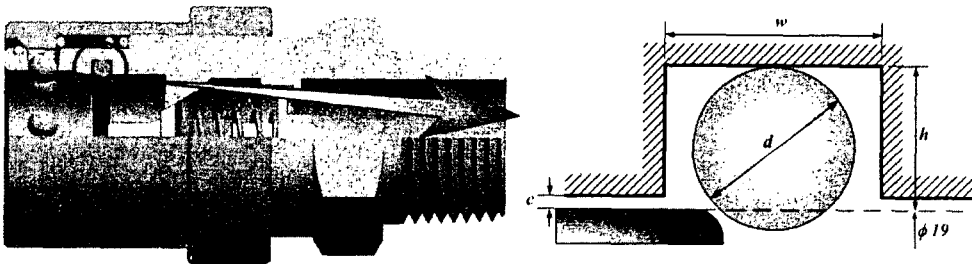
Design parameters for optimized O-ring groove using taguchi method
